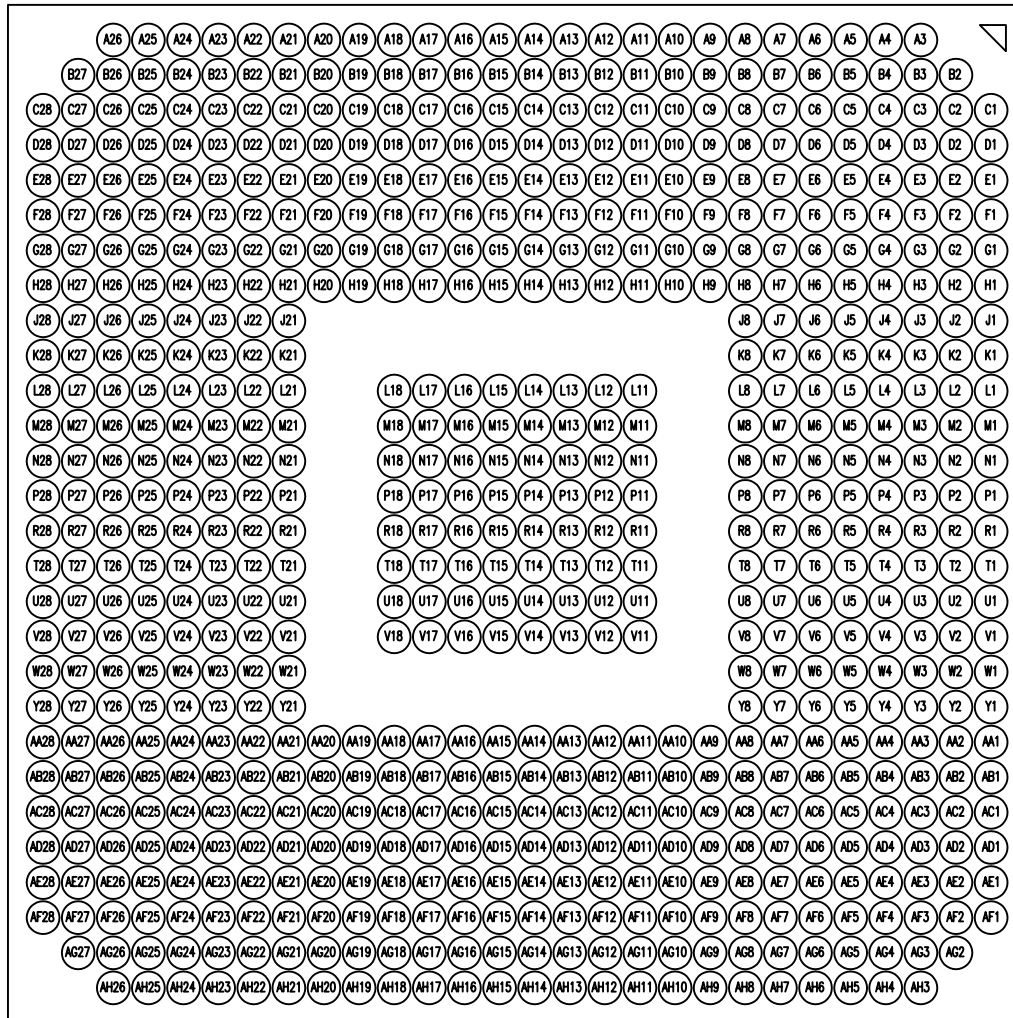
SR5650 Ball Arrangement (Bottom View)
